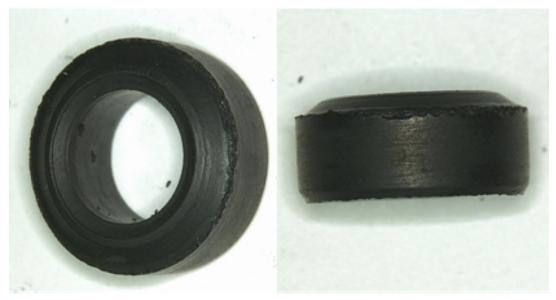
Two views of the packing removed from the fuel fitting after the first combustion heater test
